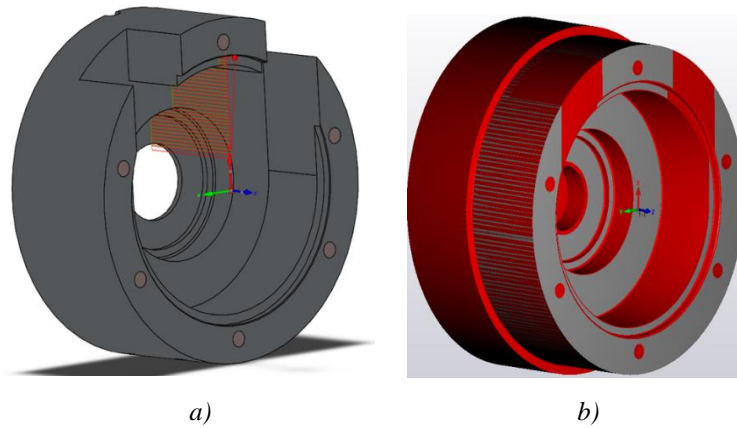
Toolpath of the tool (a) Rest material after the turning front face (b)
